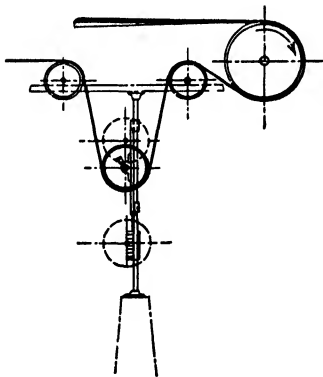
"Gravity" Take-up for Belt Conveyor.
